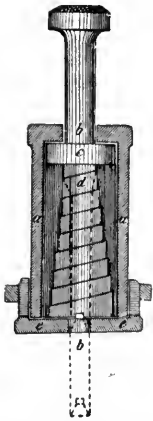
Vertical section through Kleinschmidt's spring-bolt apparatus: a, iron covering; b, bolt; c, groove; d, spring; e, head piece.
